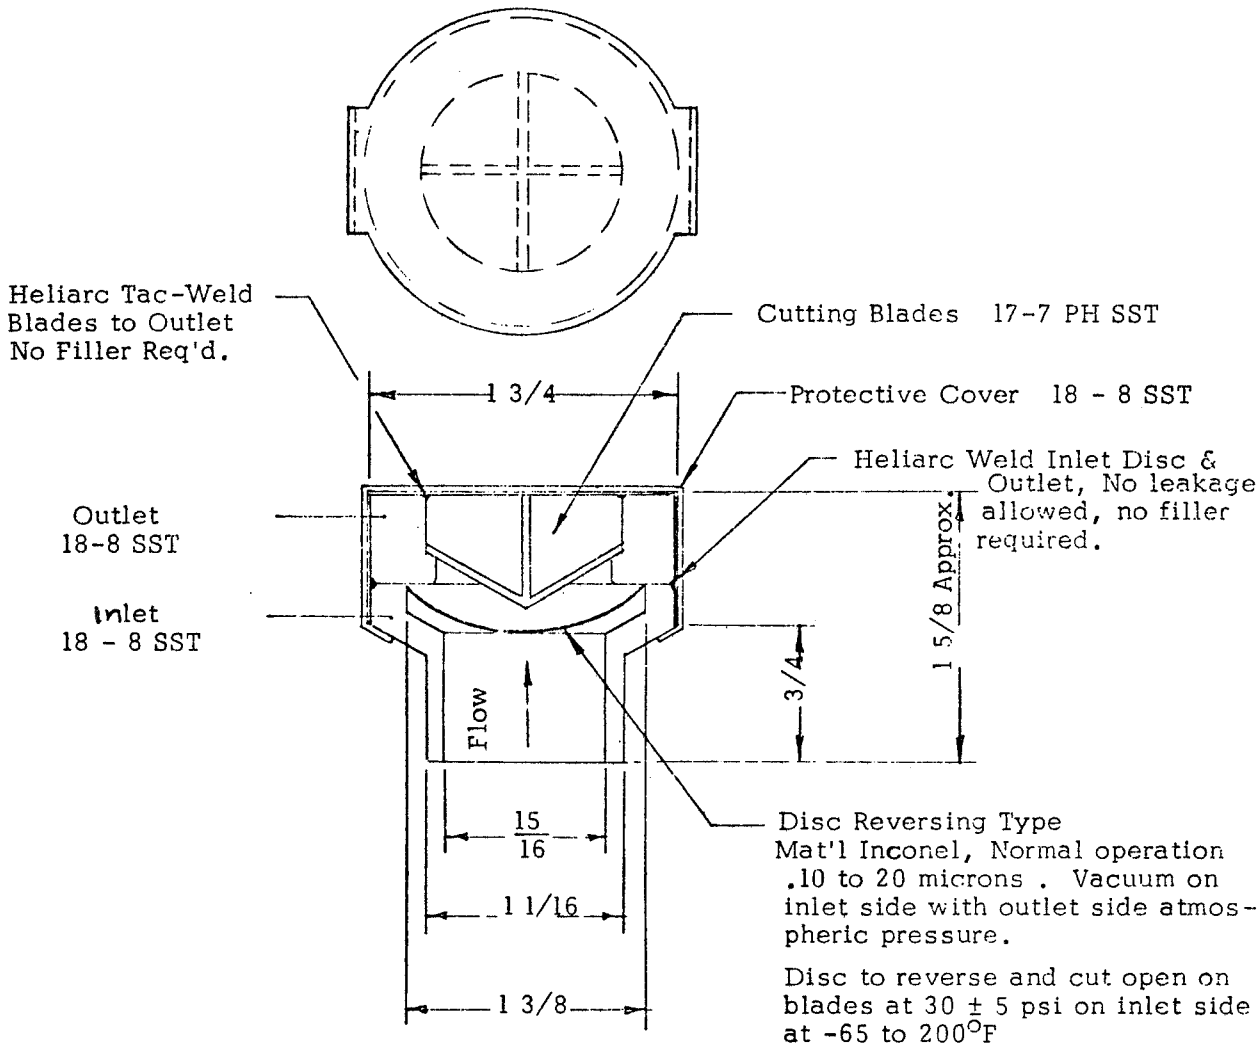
BS & B Reverse Buckling Rupture Disc, All Welded
